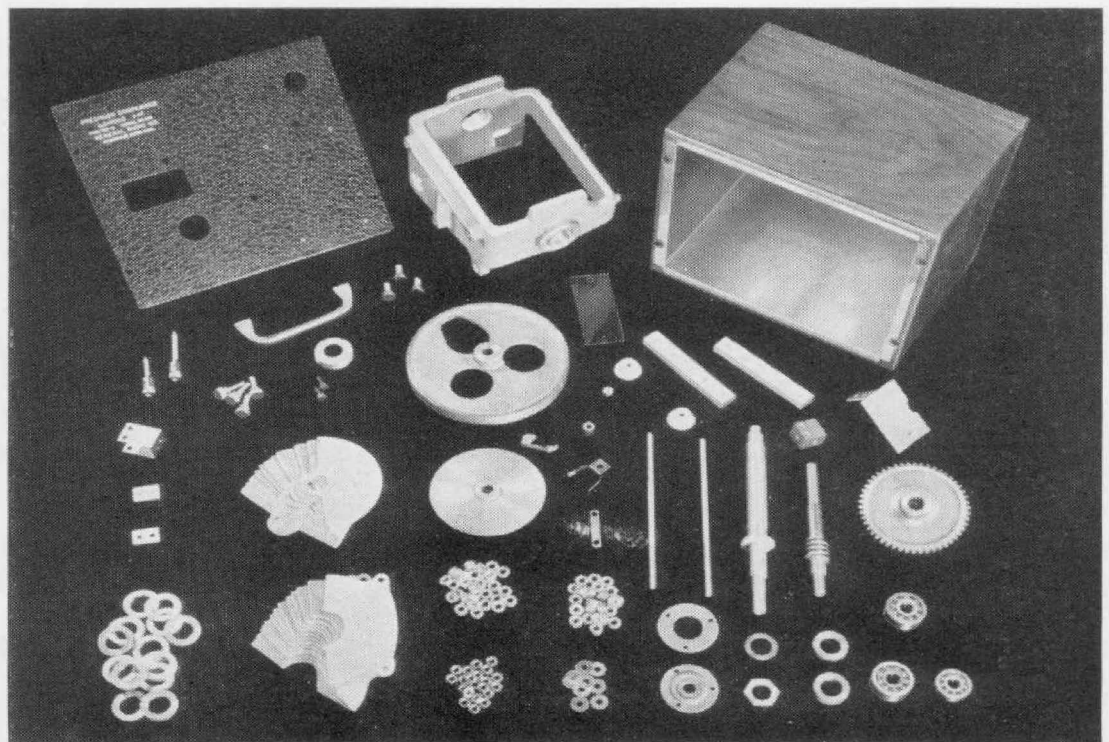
Major parts of a TYPE 722-F Precision Condenser
